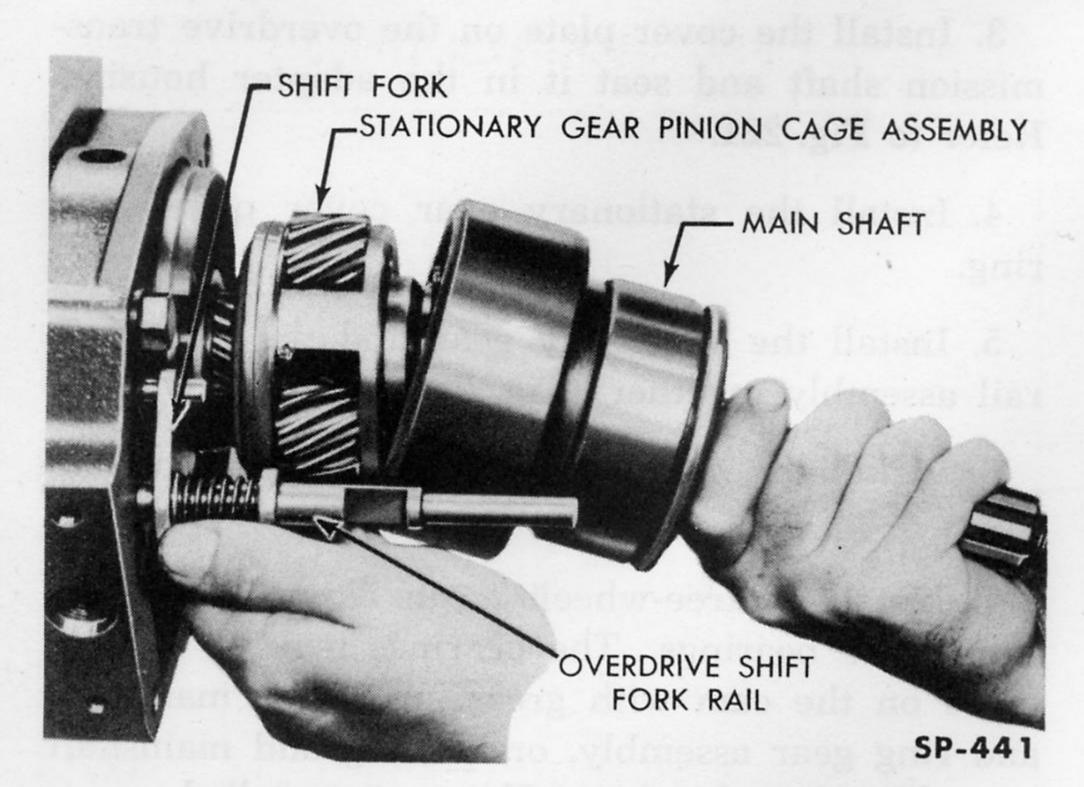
Installing Mainshaft And Ring Gear—Frazer
